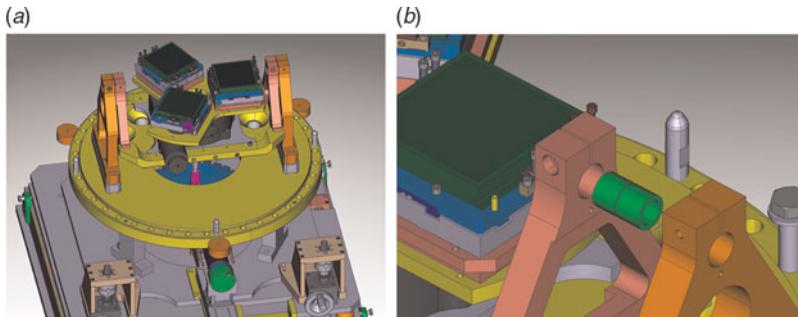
(a) Three cradles with their gratings mounted on a turn-table. (b) Details of the pitch axis bearing.
